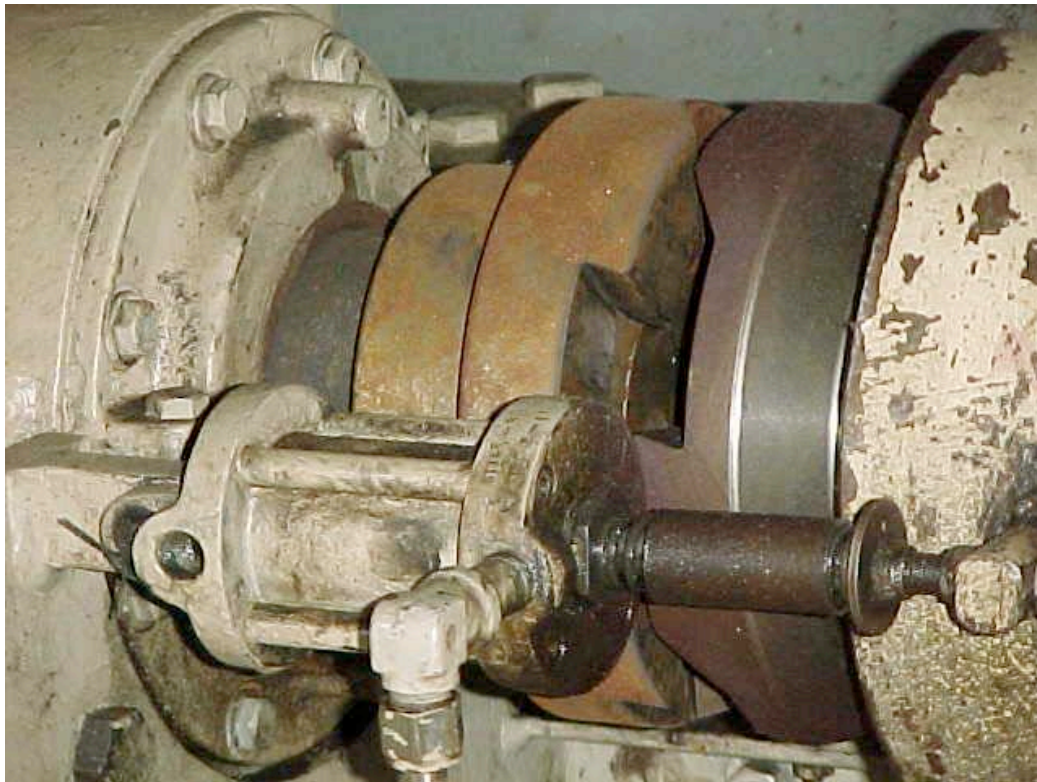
Pneumatic engaging cylinder (in foreground, side view)
